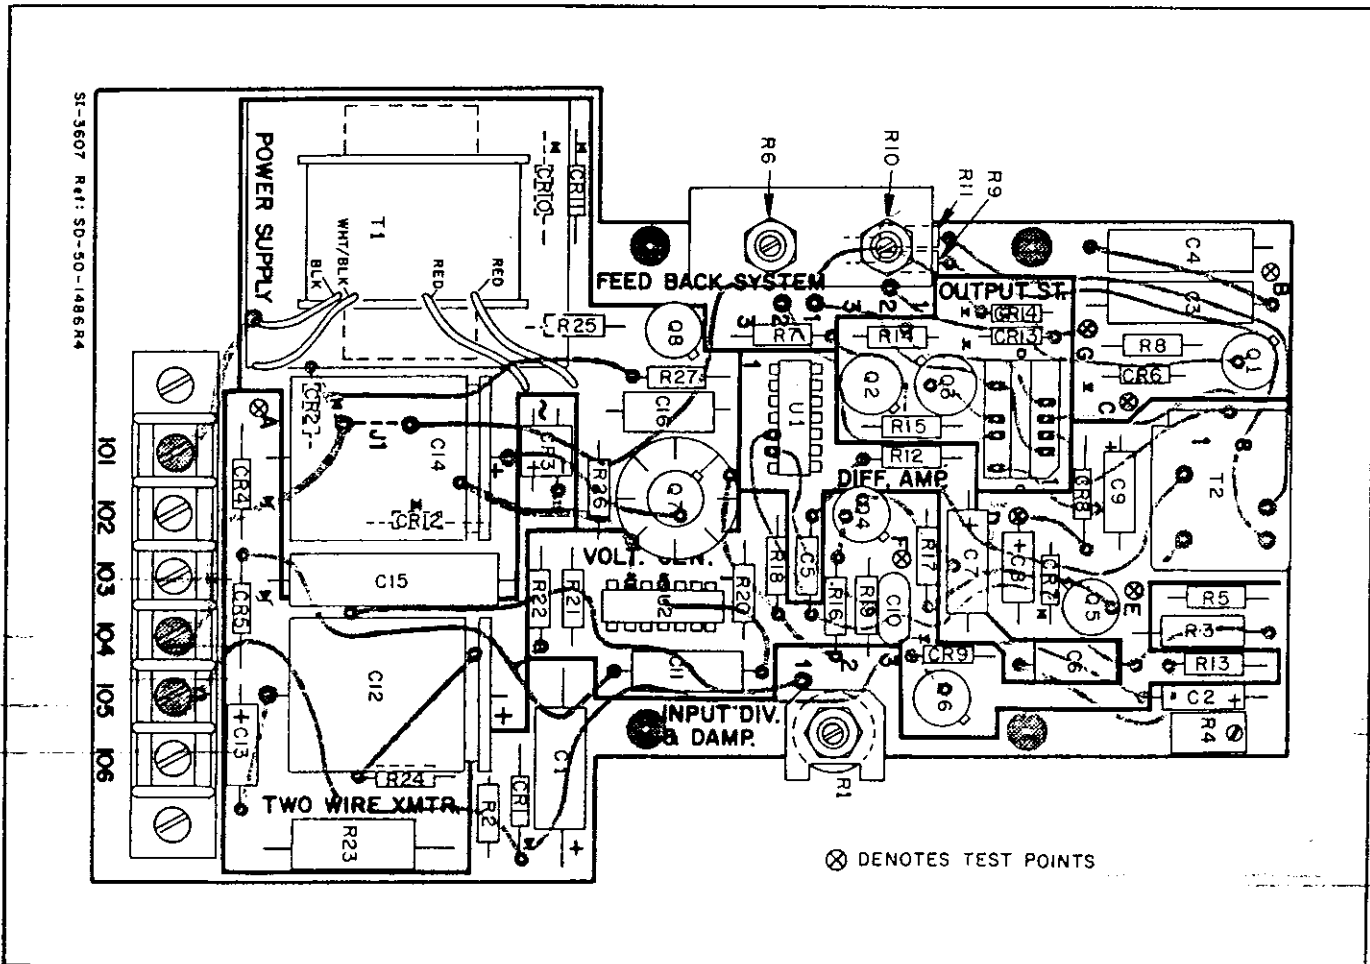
COMPONENT LAYOUT: PC BOARD
